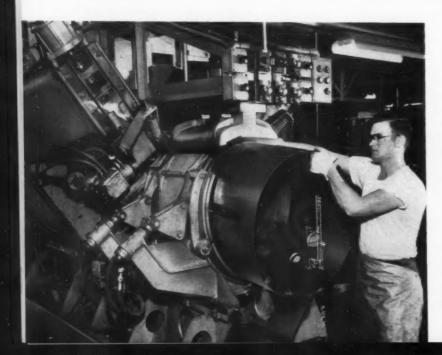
Welding machine produces a longitudinal seam to join the two ends of a wraparound cylinder for a dryer drum enclosure. Several forming operations are performed prior to welding.
